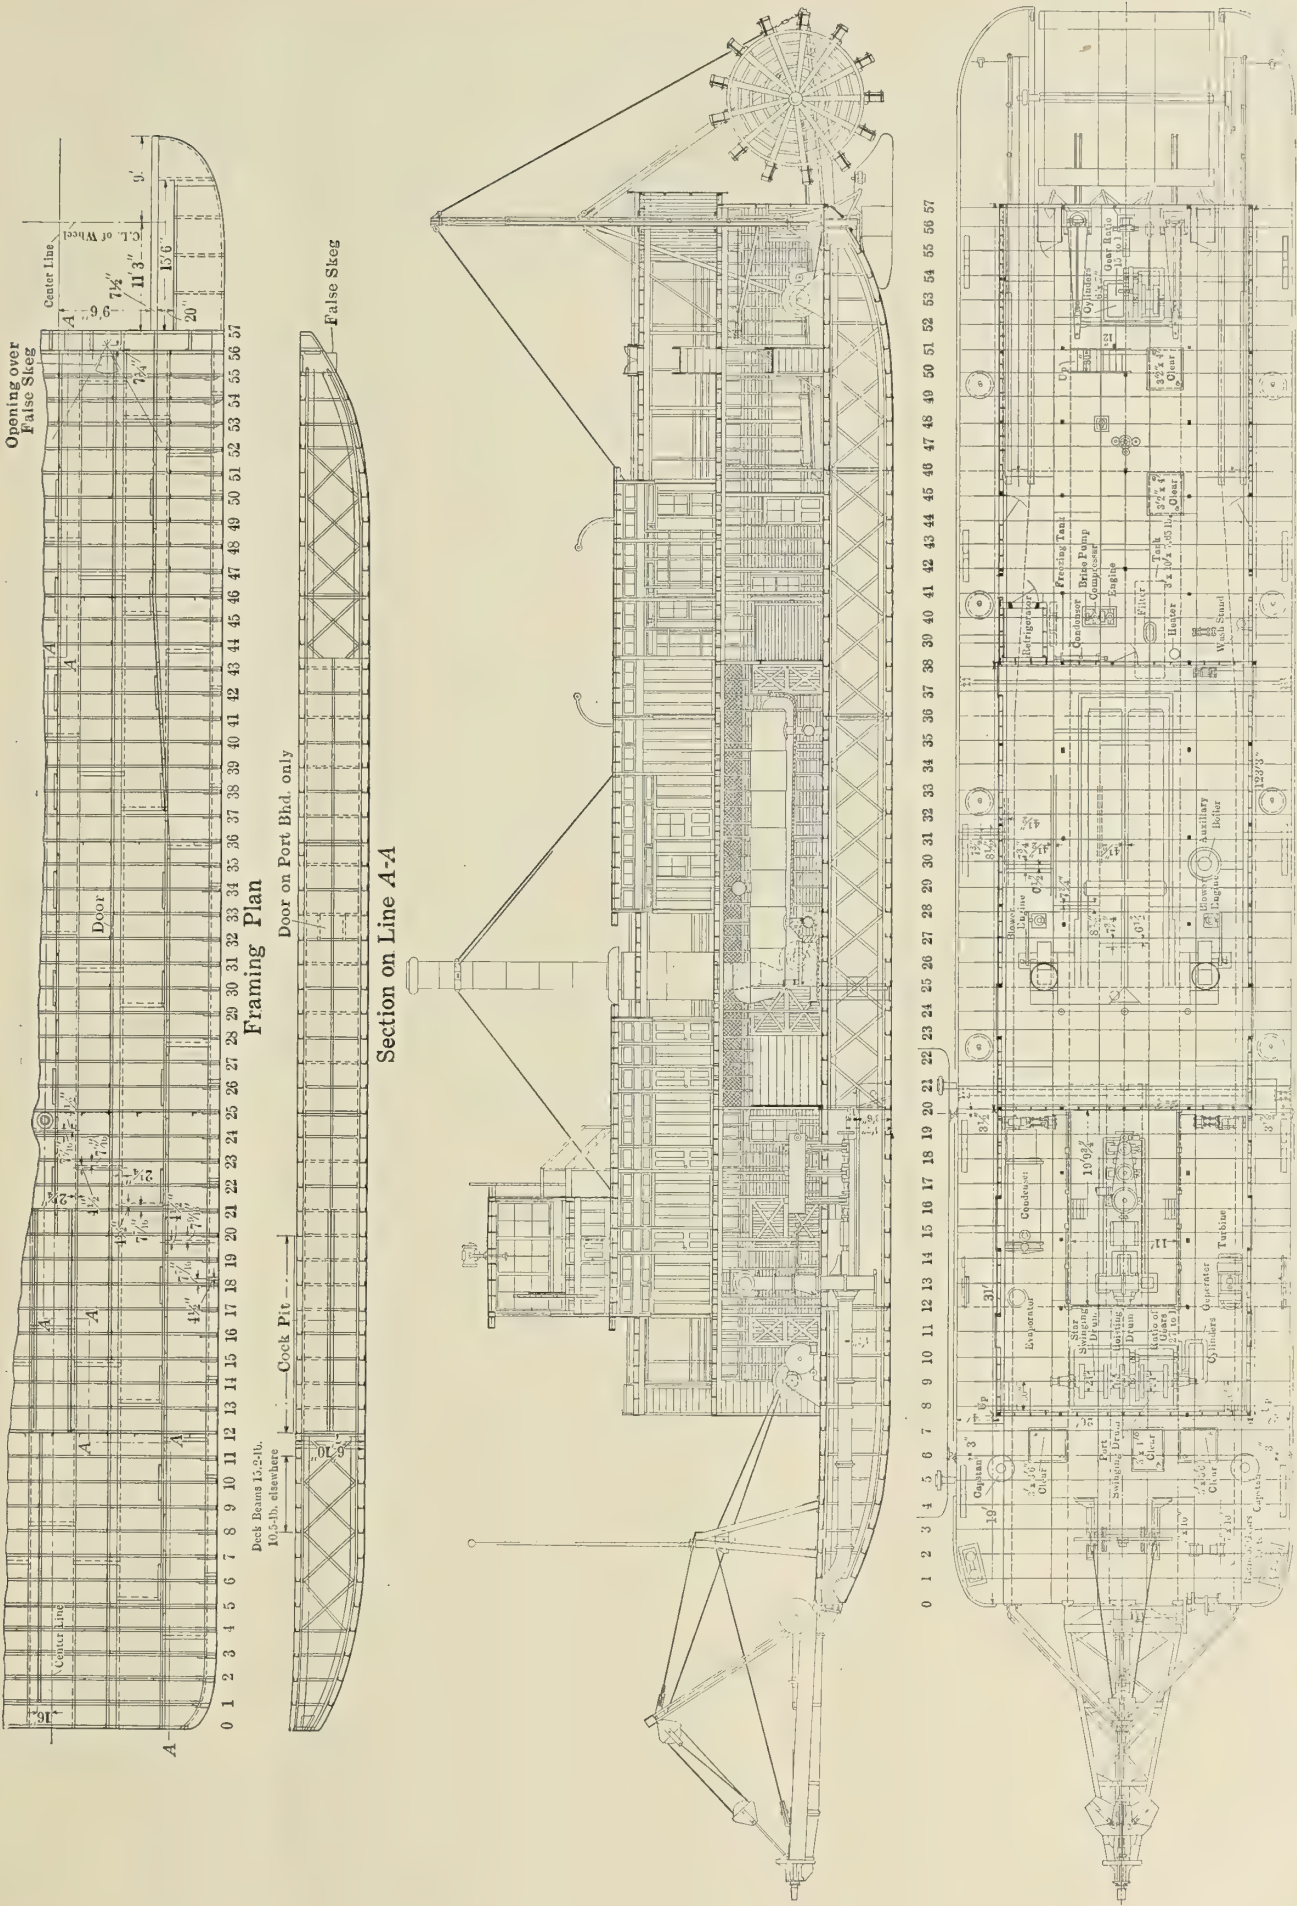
FRAMING AND GENERAL ARRANGEMENT PLANS OF THE DREDGE WATERWAY
